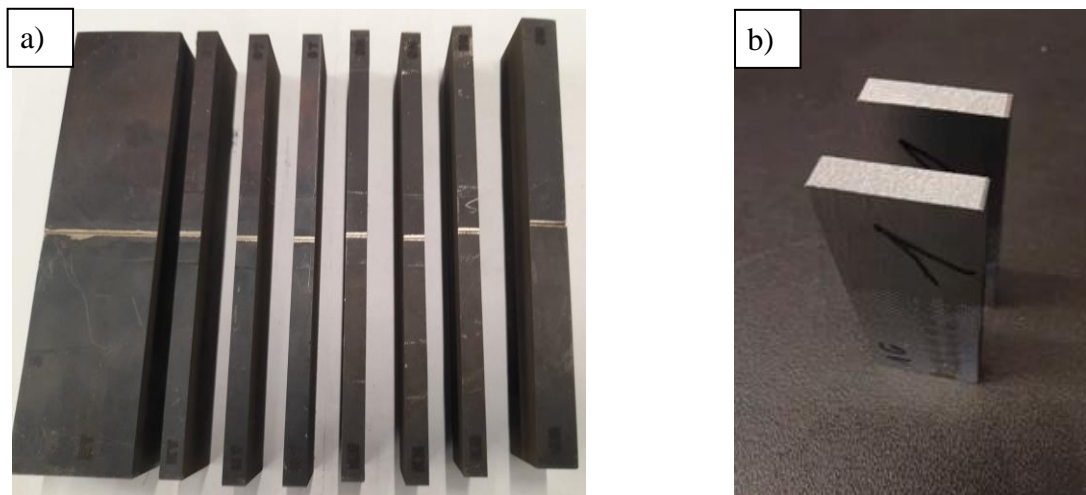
a) View of KT-DT and KN-DN solder joint specimens for strength tests after electrosark cutting, b) Tensile view of a KT-DT brazed joint sample, brazed joint breakthroughs visible
